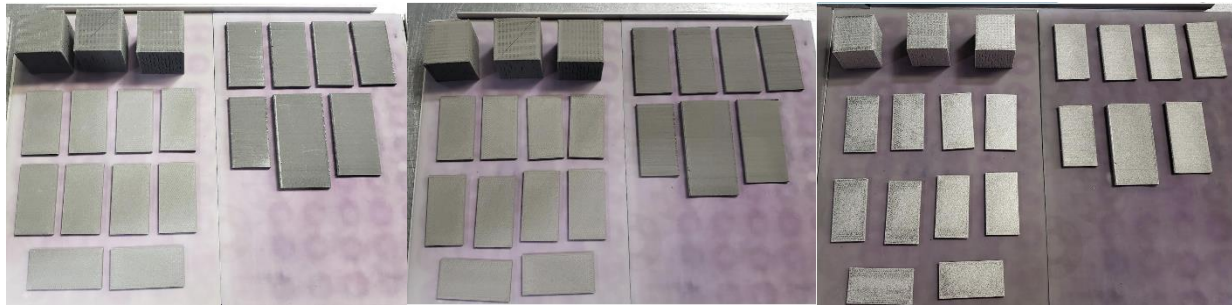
Printed (left), debound (middle), and sintered (right) parts. The printed parts were sent to MatterHackers using BASF Forward AM Ultrafuse 17-4 PH Processing Ticket and MatterHackers provided the debinding and sintering services. Images provided by MatterHackers [9].
